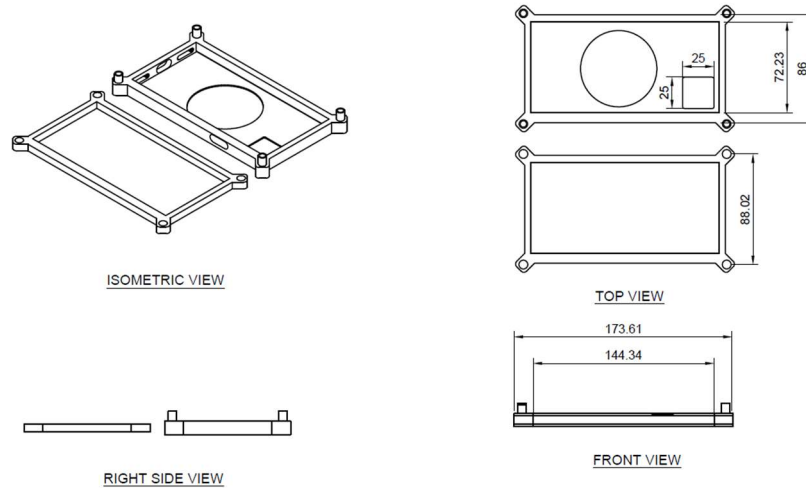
Version 2 case CAD drawings with access to power button and dowel pin attachment
